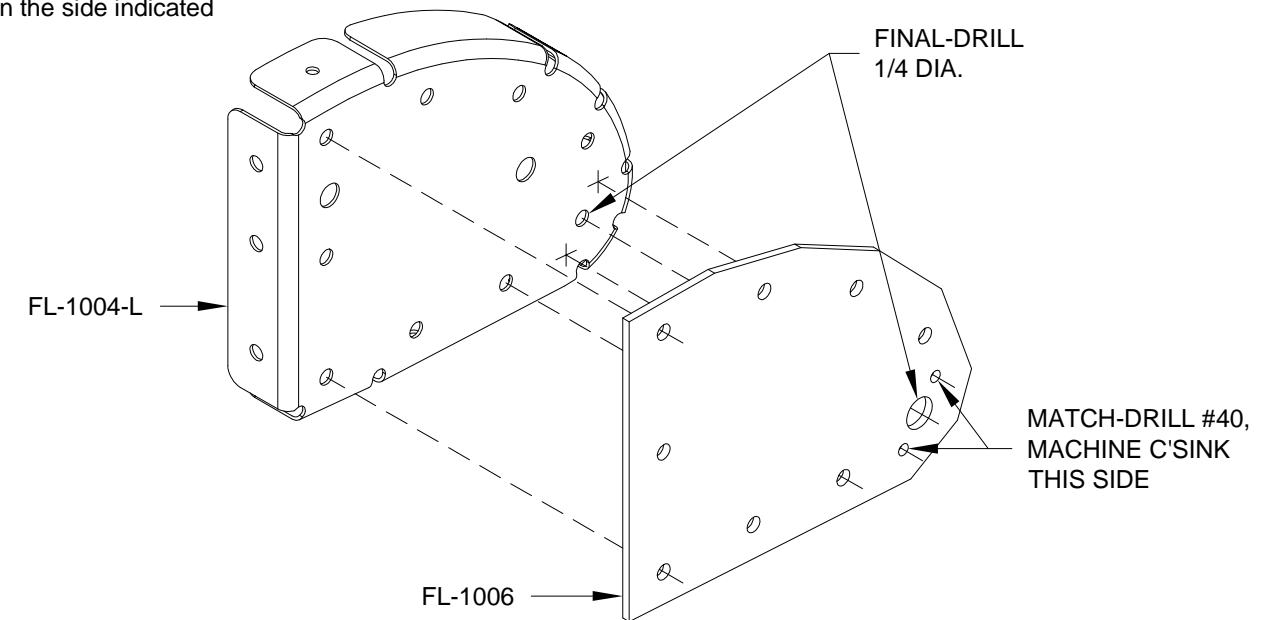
OUTBOARD ROD END RIB SUBASSEMBLY
